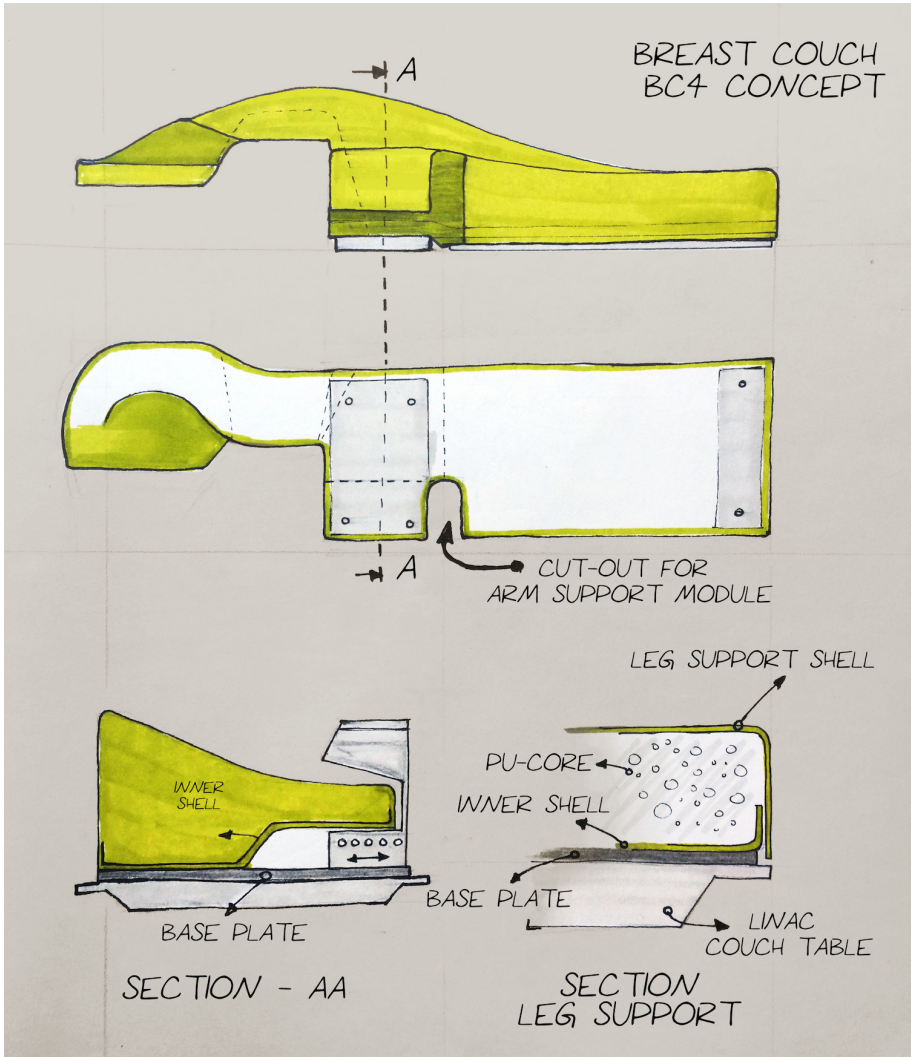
Breast couch BC4 concept. Top: full unibody of upper shell with cut-out for arm support module. Middle: top view of unibody. Bottom: section views of abdomen region with new baseplate (left), and leg support shell (right).
